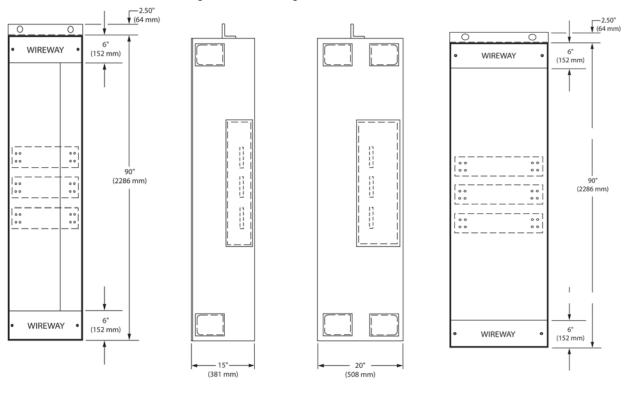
Mounting Dimensions for 15 in. and 20 in. Sections
